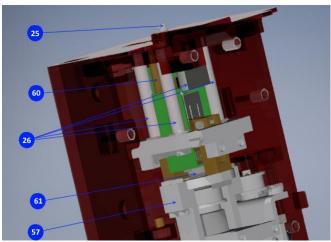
Control box angled view, showing the emergency (middle CBC piece) pushback mechanism for decoupling the coupling pieces
